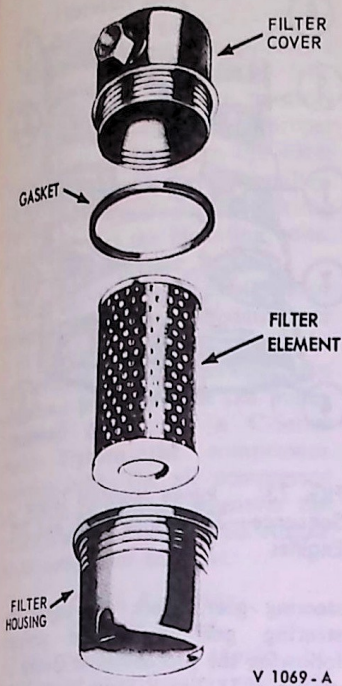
Typical In-Line Fuel Filter—500-800 Series with Electric Fuel Pump
